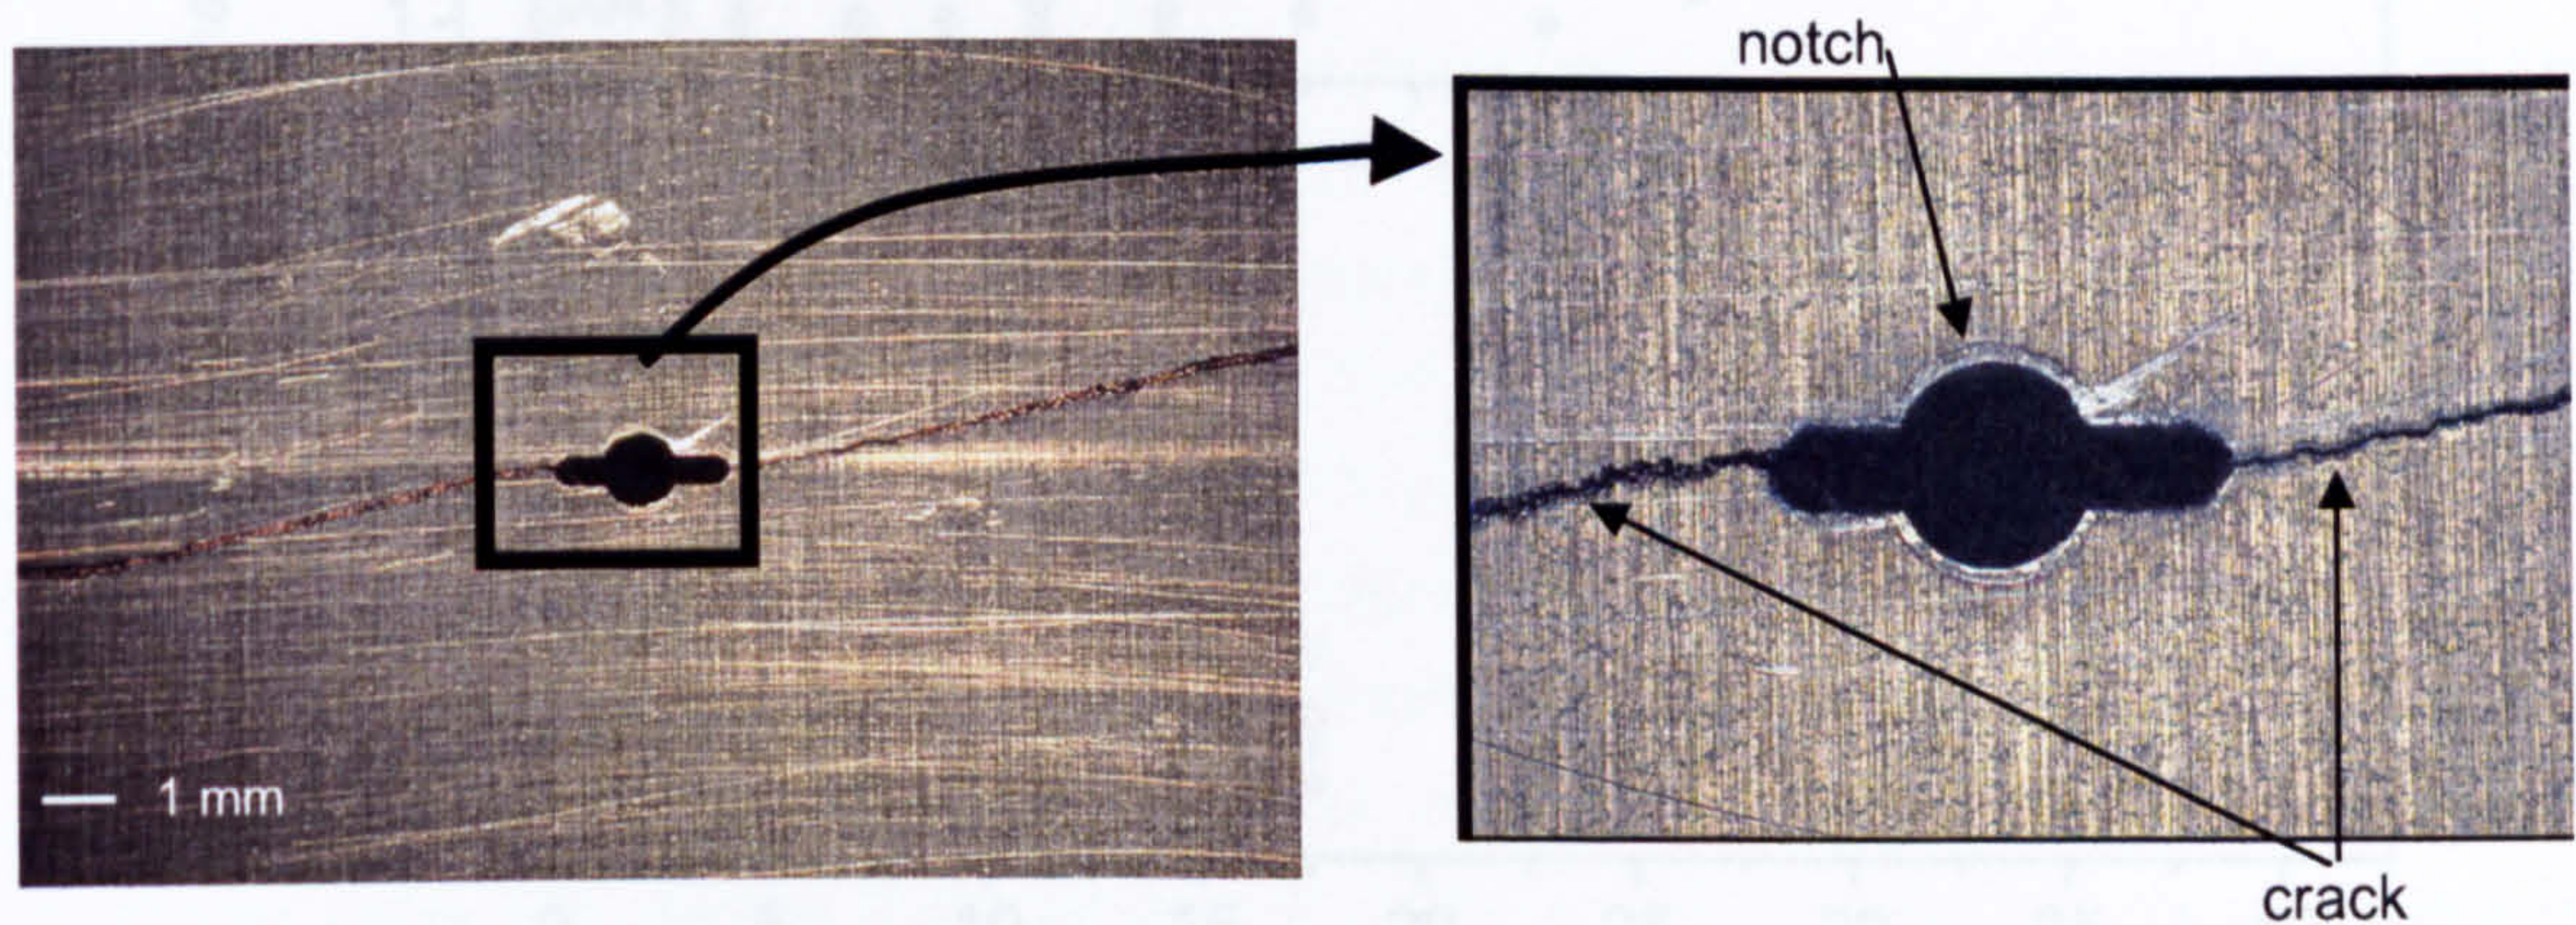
Photograph of specimen 2 and detailed view of the crack.
